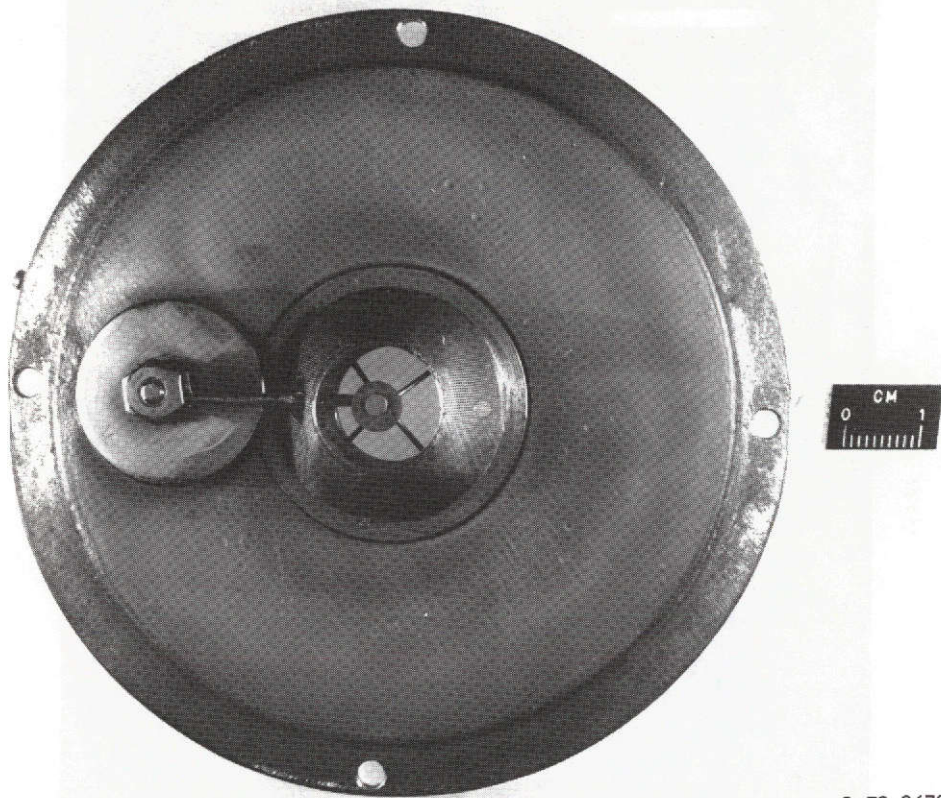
Thruster back plate assembly after 1156 hours operation.
